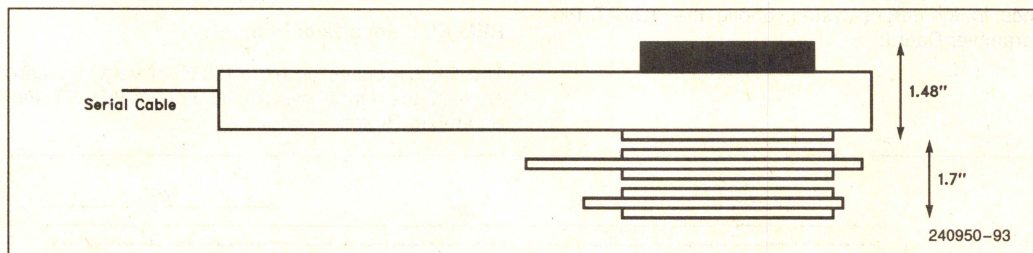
ICD-486 Probe Dimensions with Optional Isolation Board (OIB) and ADAPT Pin Scrambler Board Installed
